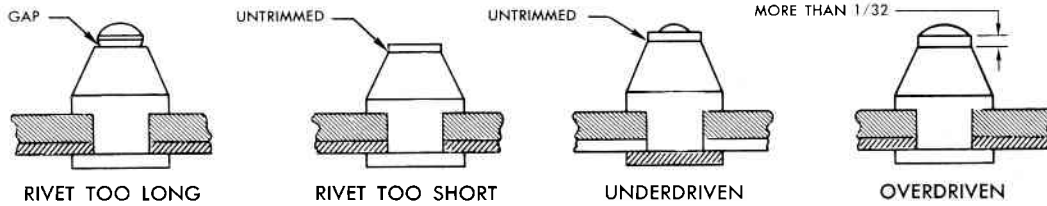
Q4304 and Q4310 Rivet Installation (Sheet 2 of 2)
